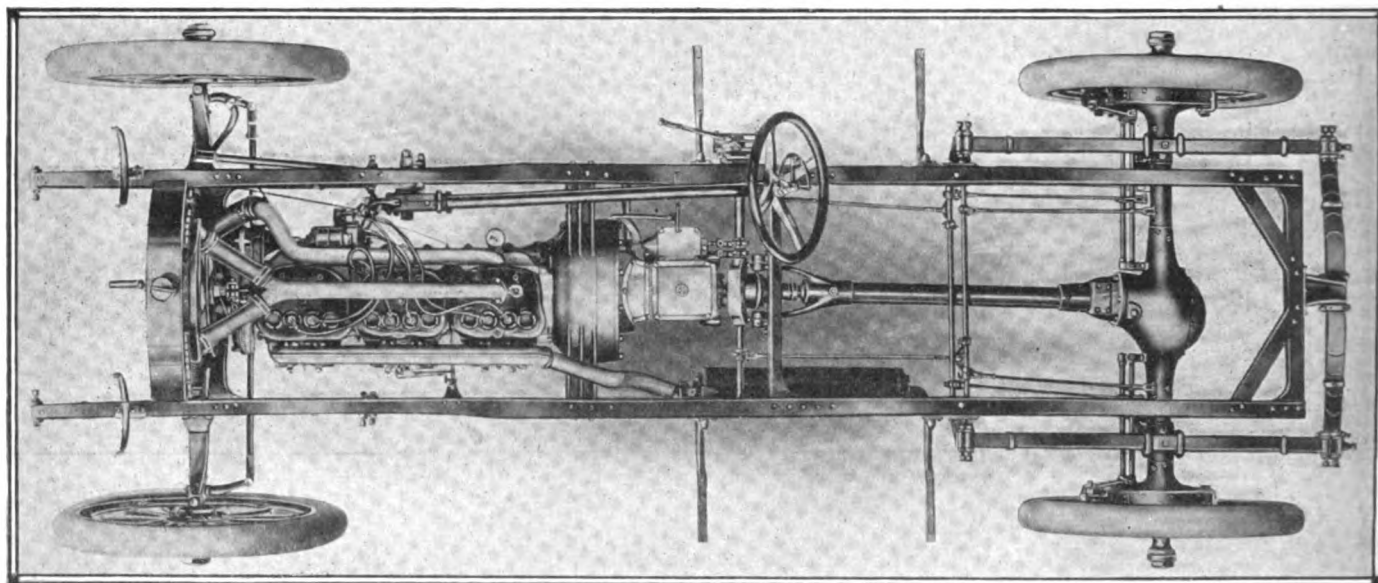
Plan view of Havers 6-44 chassis, showing Y-shaped water outlet manifold and unit power plant
